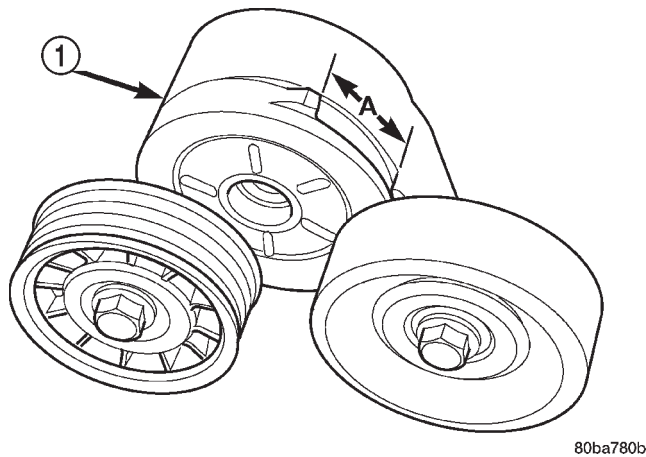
Accessory Drive Belt Wear Indicator—4.7L Engine
